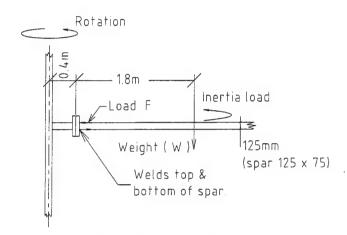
Stress in welds joining spar mounting plate to paddle main spar
